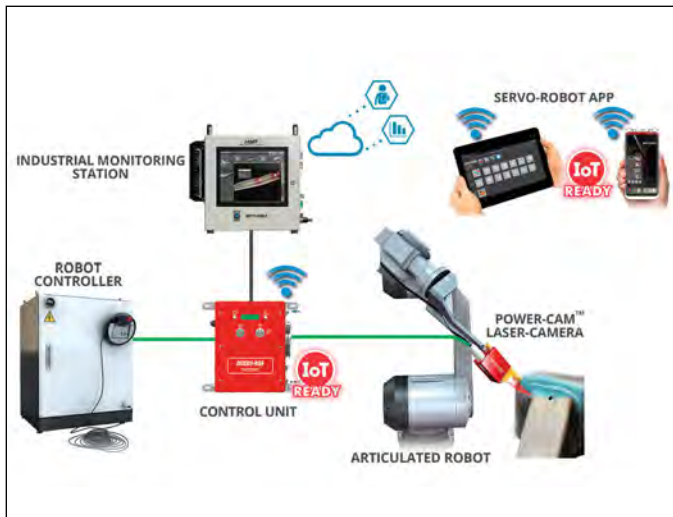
Example of the typical configuration of the 3D robot vision weld inspection system.
